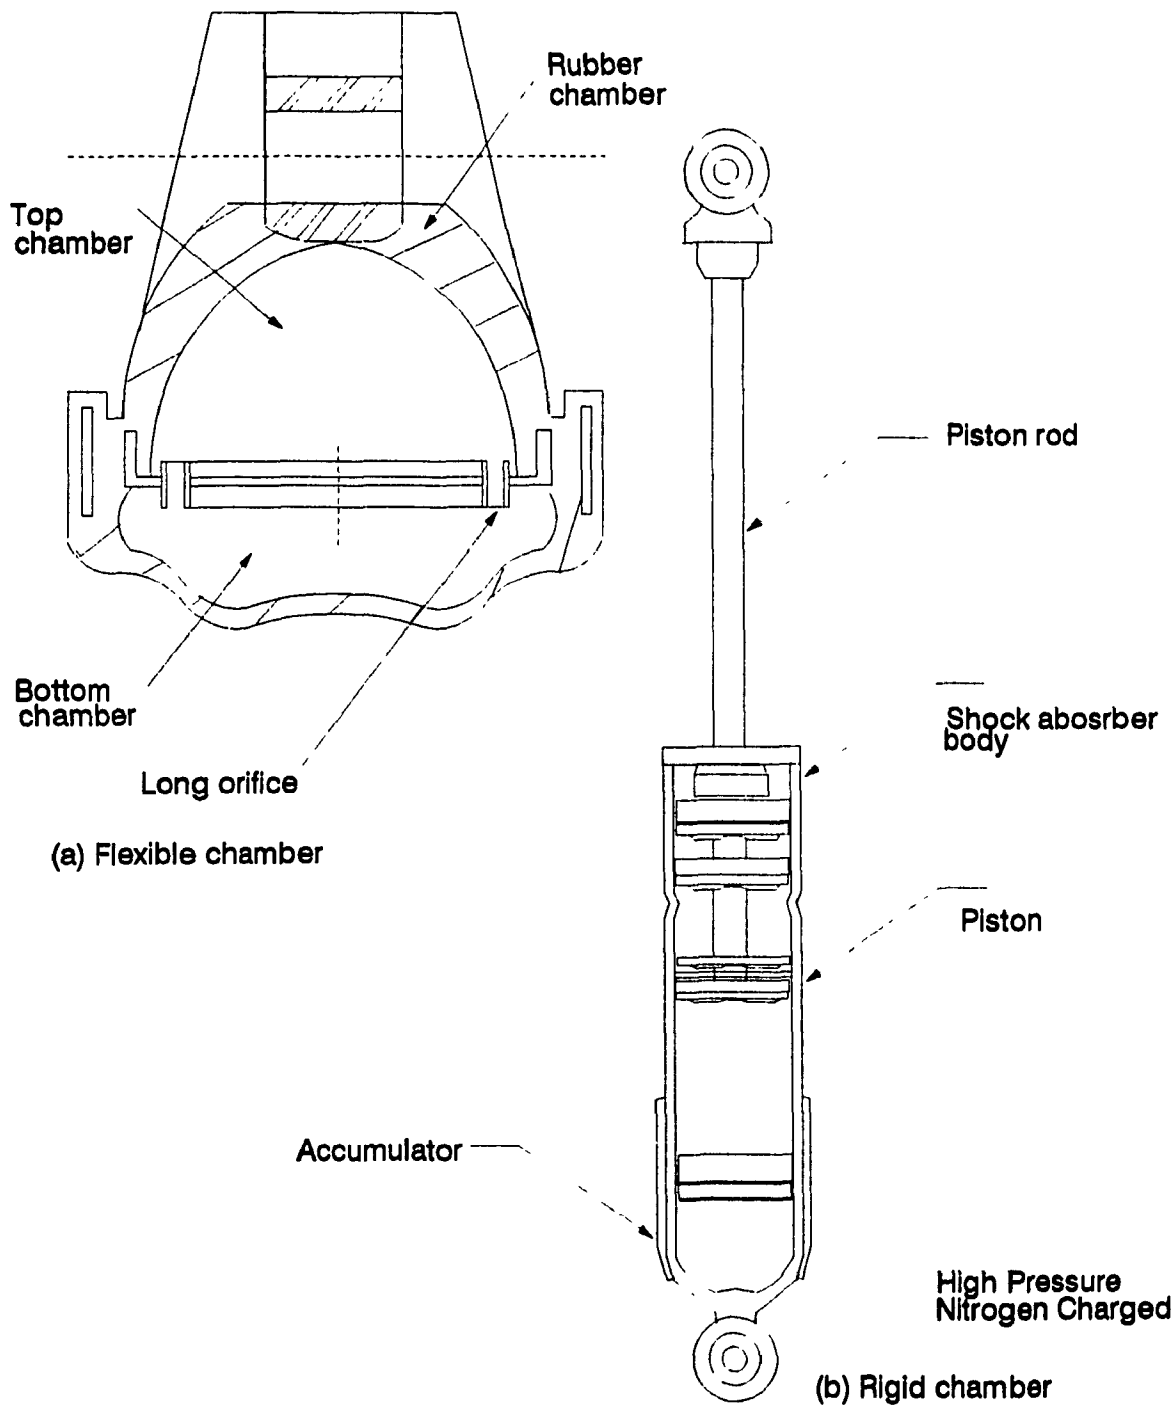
Typical hydraulic dampers with: (a) flexible chambers; (b) rigid chamber.
